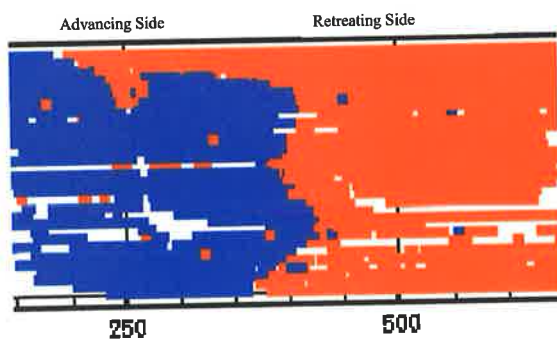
Interface Between Advancing and Retreating Side for a Cold Weld
